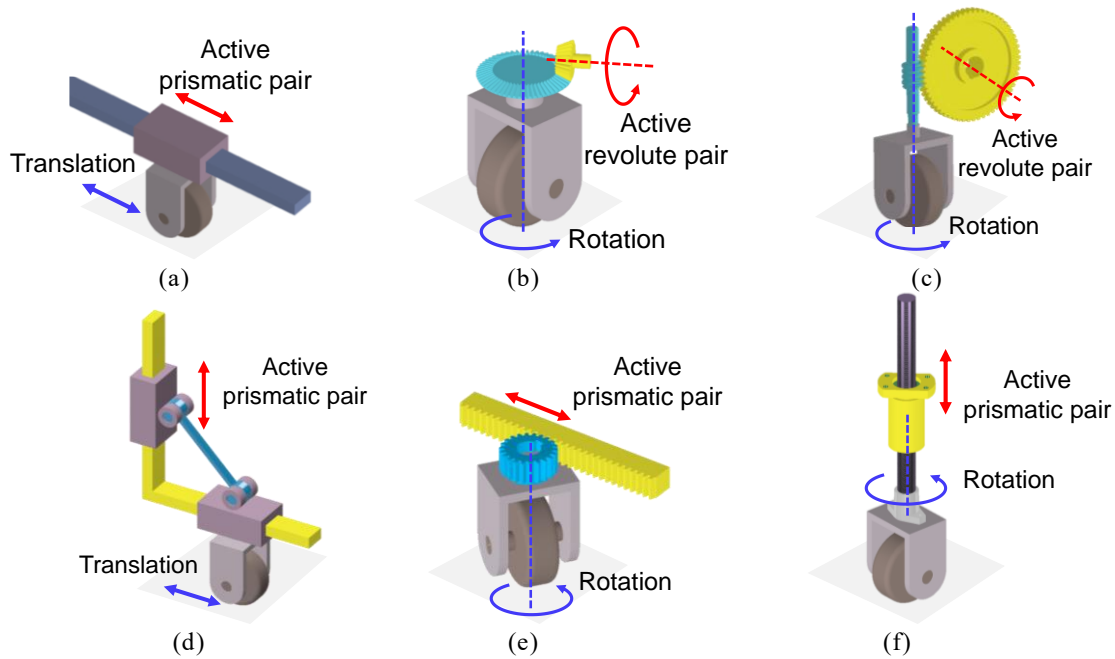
Examples of transmission mechanisms between driving unit and connecting chain. (a) Direct drive, (b) Bevel gear mechanism, (c) Worm drive mechanism (d) Orthogonal double-slider mechanism, (e) Rack and pinion, and (f) Helical mechanism.
